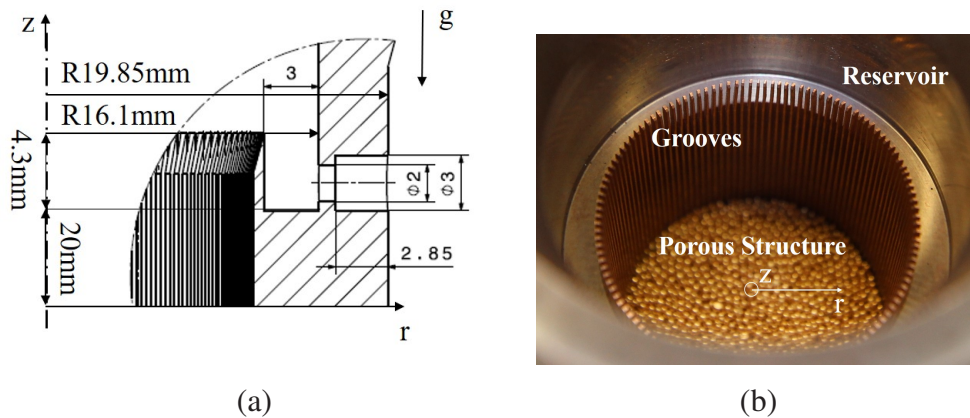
Inner view of HPEE mock-up (a) drawing of the reservoir; (b) manufactured grooves and porous insert.
